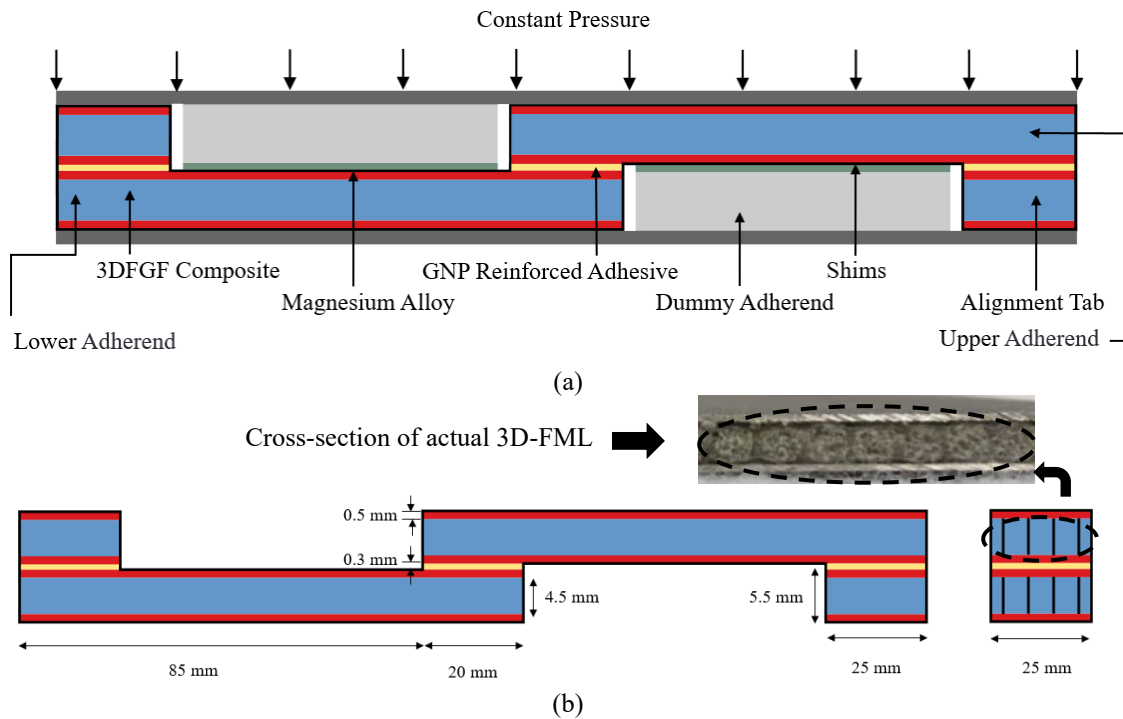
Schematic of (a) specially designed fabrication jig, (b) dimension of single-lap 3D-FML ABJs.
